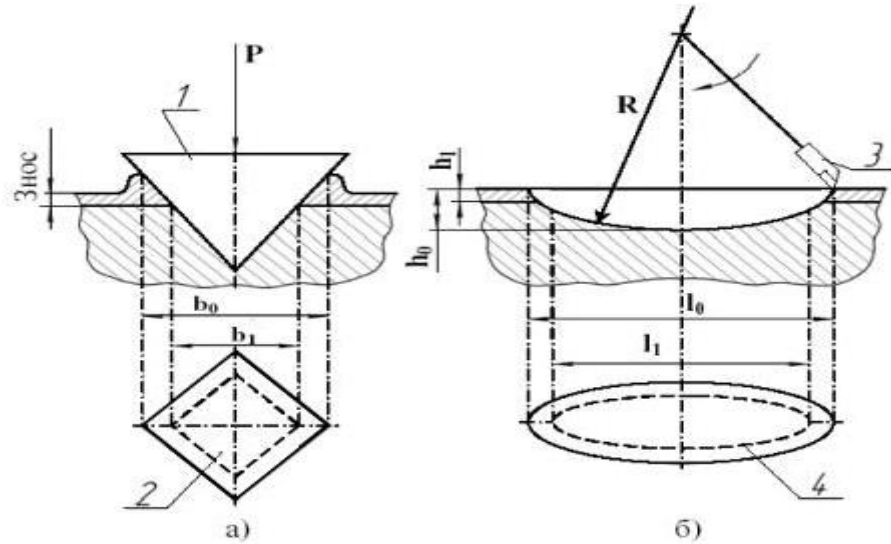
Schemes of imprint (a) and holes (b) to determine the value of wear of guides: 1 - diamond pyramid; 2 - imprint; 3 - cutter; 4 – hole
